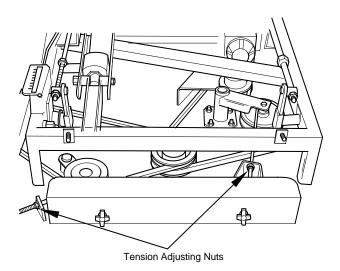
Blade Belt Tension Adjustments (Mag-72 Deck Shown)
